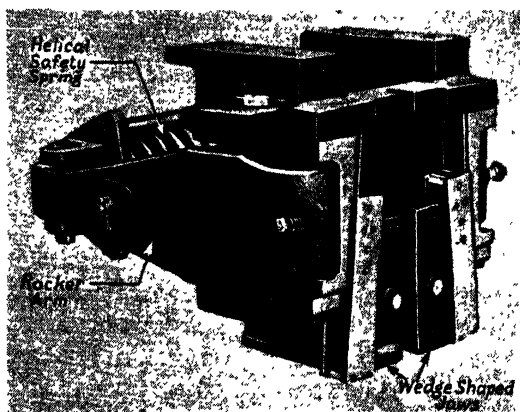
FLEXIBLE GUIDE CLAMP SAFETY GEAR
